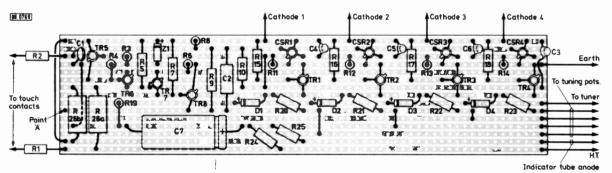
Layout of the digital touch tuner unit on Veroboard. Note that R1 and R2 should be mounted off the board behind the touch contacts.
